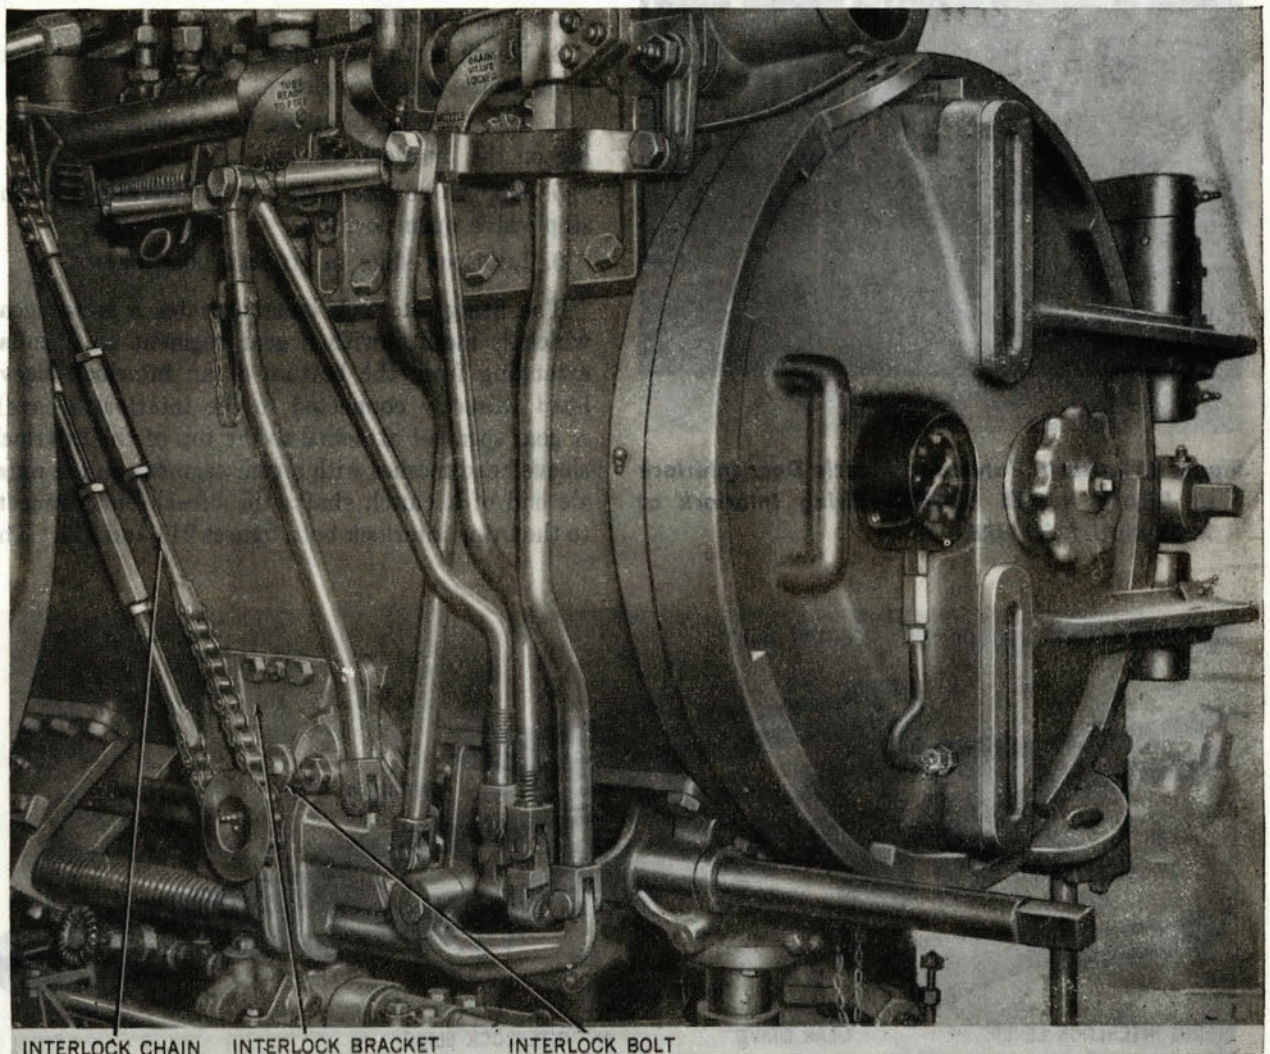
Drain Valve and Muzzle Door Interlock at MUZZLE DOOR CLOSED—Firing Interlock at MUZZLE DOOR UNLOCKED.
